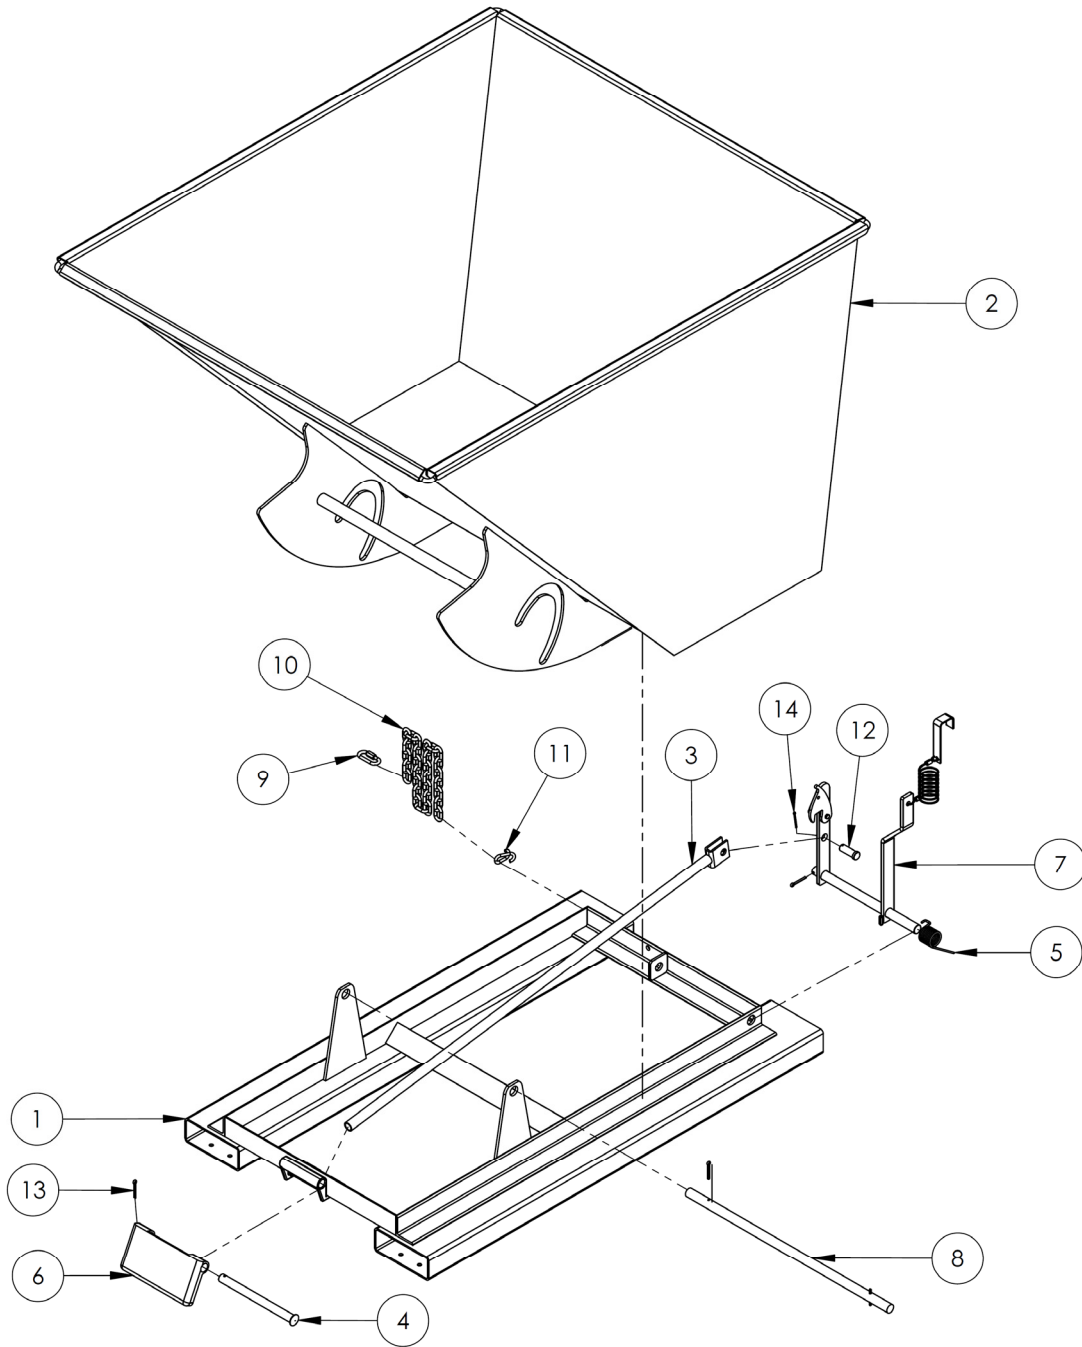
D-150 series hoppers exploded parts diagram &amp; bill of materials
